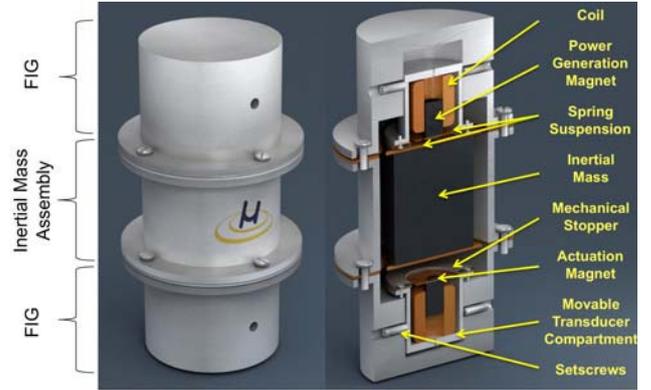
Conceptual diagram of the bridge harvester implementation. The WC inertial mass is suspended on two copper springs in the middle. The FIGs are shown on top and bottom, clamped using setscrews inside a holding fixture.
